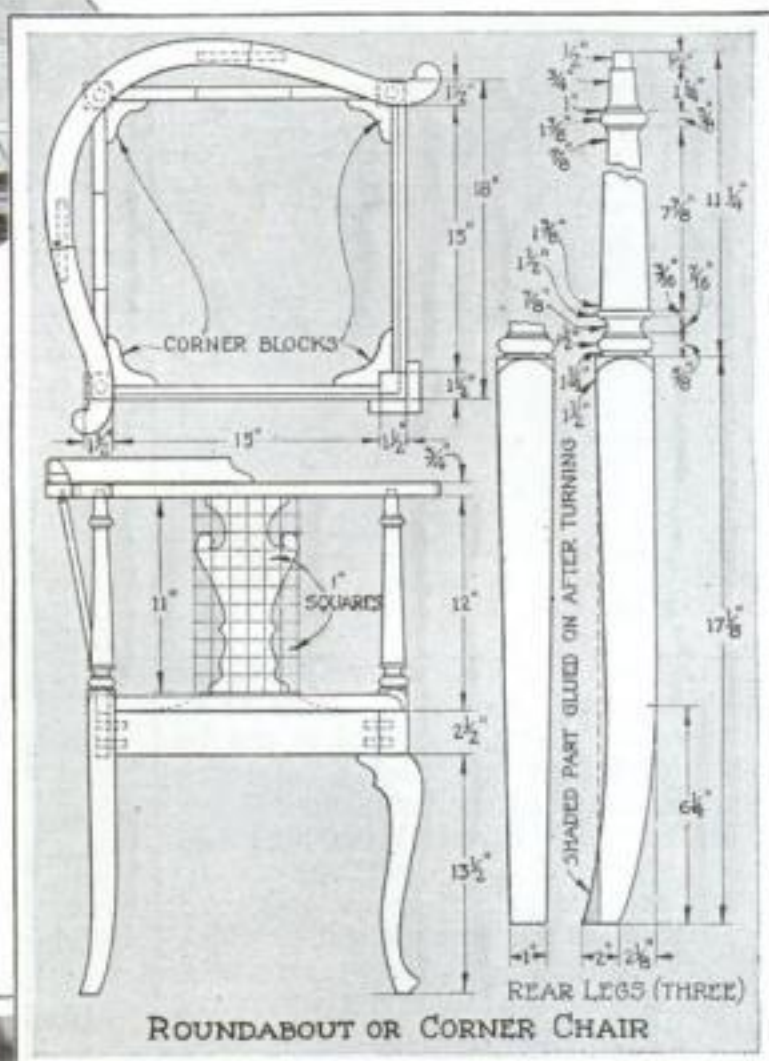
Assembly views of the corner chair and drawings showing the shape of the rear legs.
